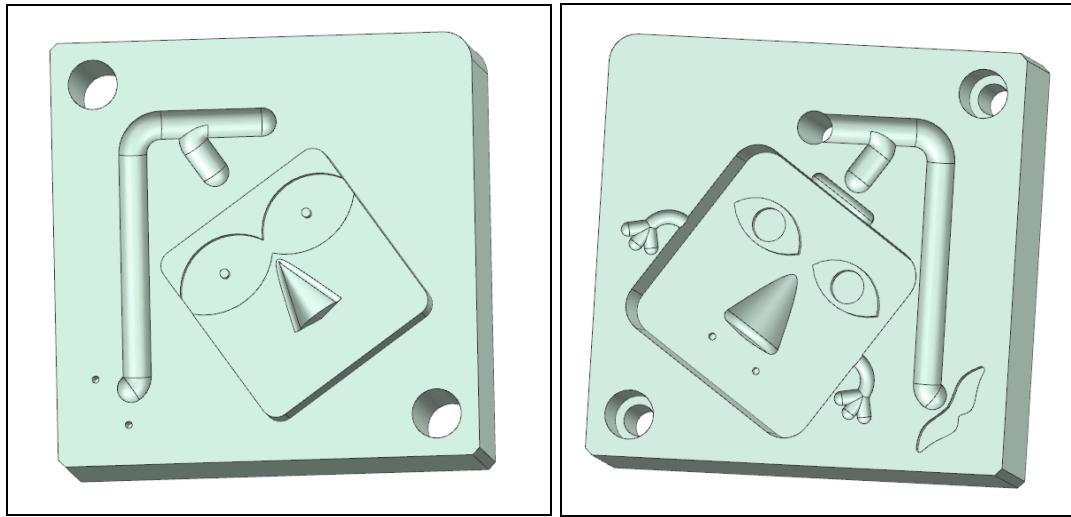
CAD model of molds for top core (left) and top cavity (right) showcasing runner designs and fillets.
